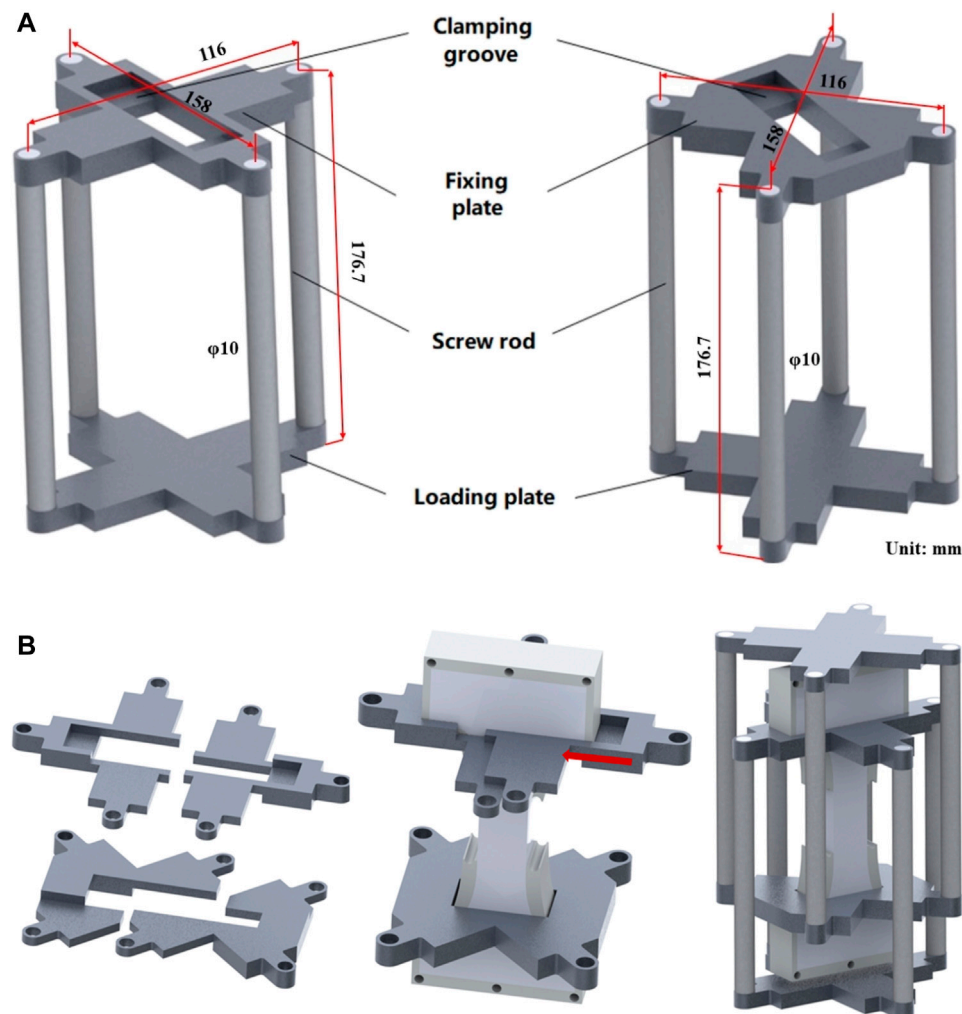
| Compression to tension load converter: (A) different parts of the apparatus and (B) the assembly of the apparatus.
